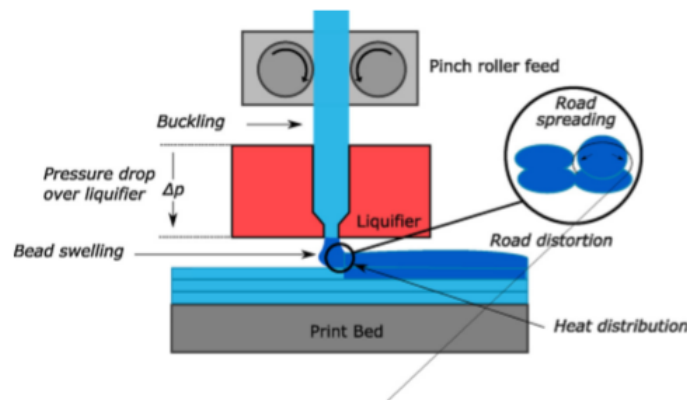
Anet A8+ 3-D printer's pin-head printer nozzle [Blok et al., 2018].
